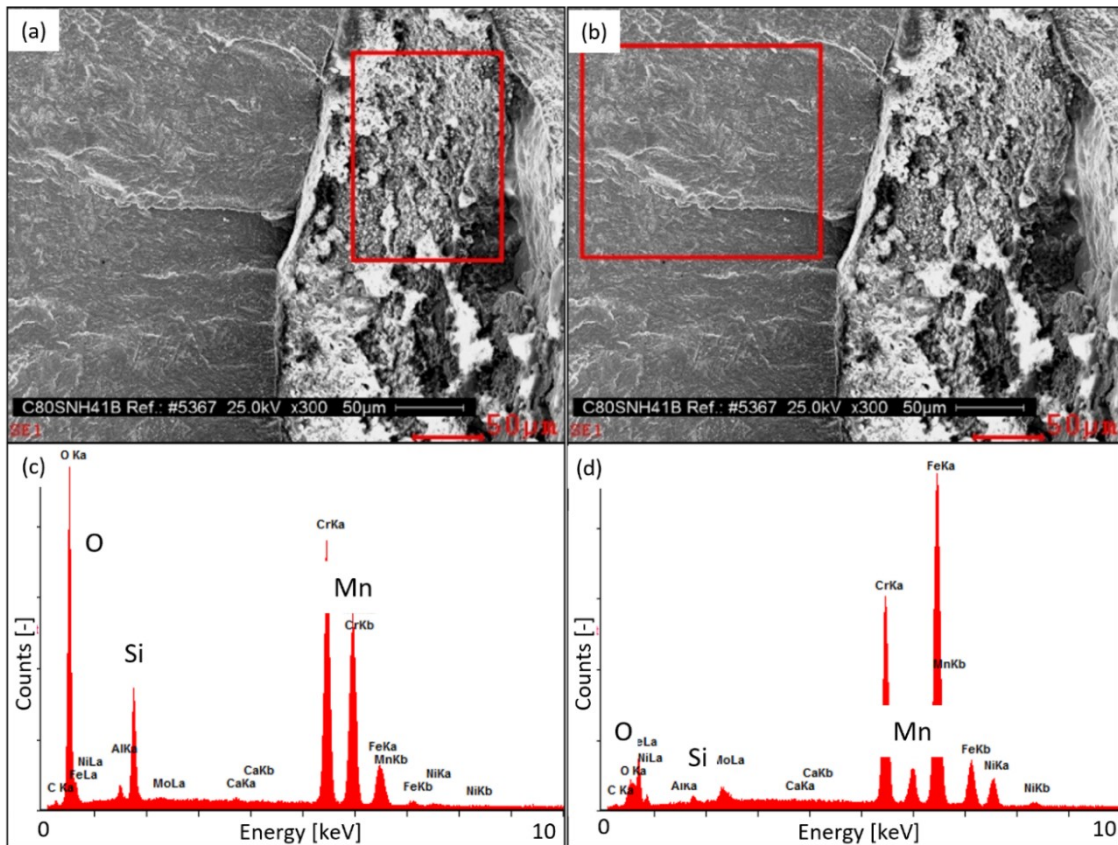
(a) Measurement location on the defect and (b) fracture surface with the corresponding EDX spectra ((c) and (d)) respectively.
